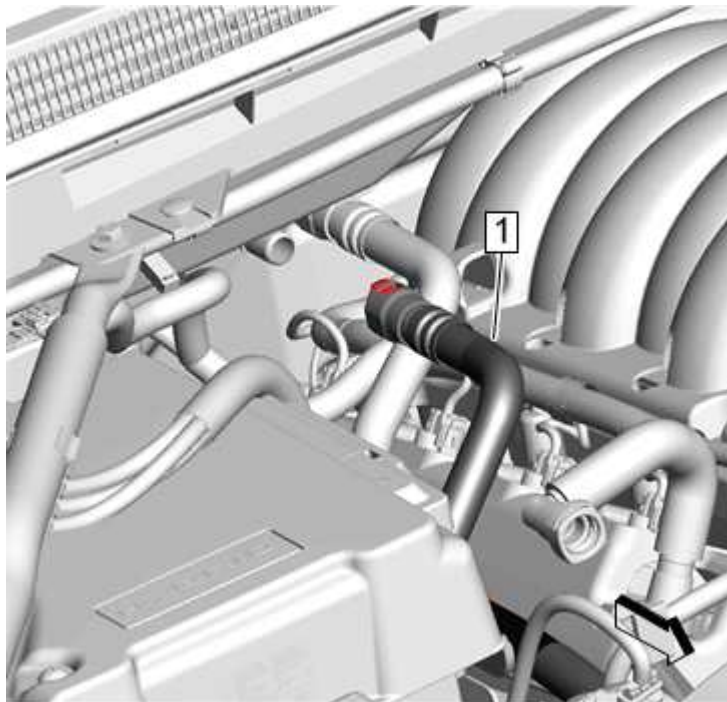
Heater Outlet Hose And Heater Core Outlet Tube
